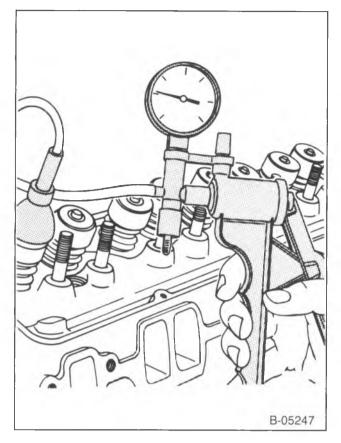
Checking the Valve Seal (5.0L and 5.7L Engines)
